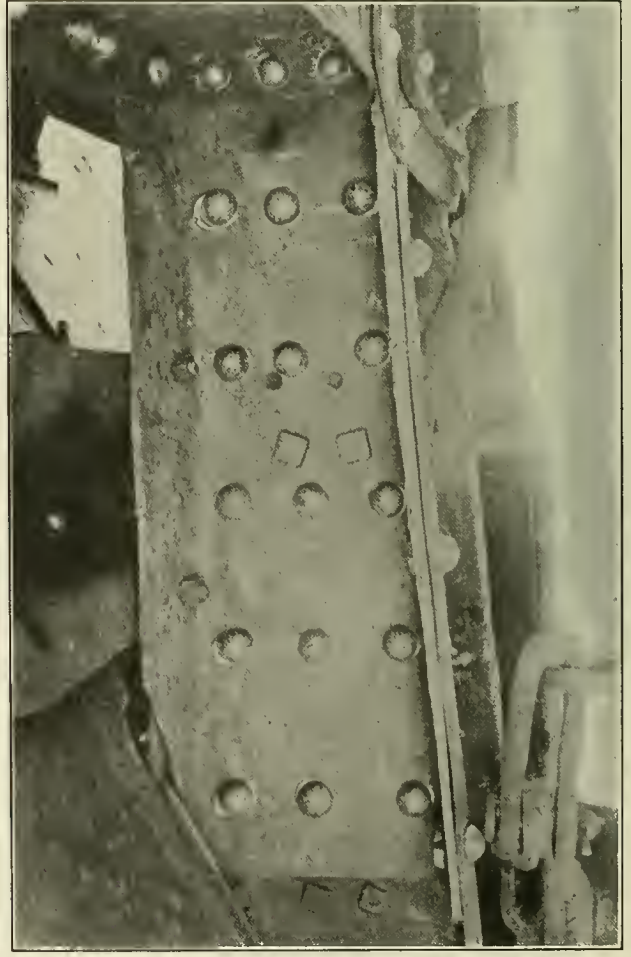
CENTER SILL SPLICE MADE AT THE WEST-BOUND REPAIR YARD.
